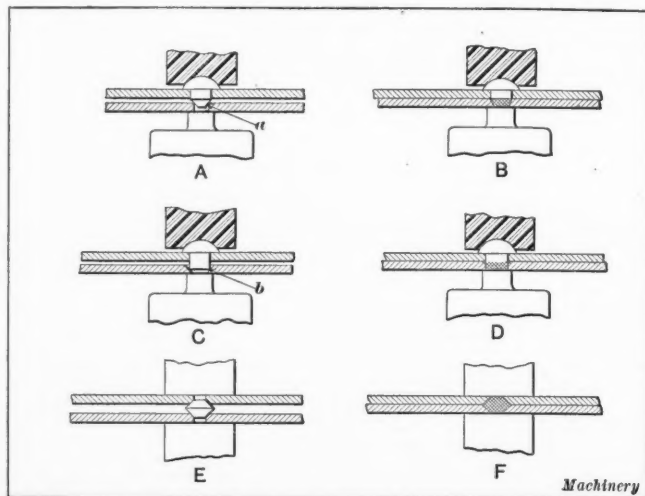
Diagram illustrating Various Processes of accomplishing Electric Riveting on a Spot-welding Machine
